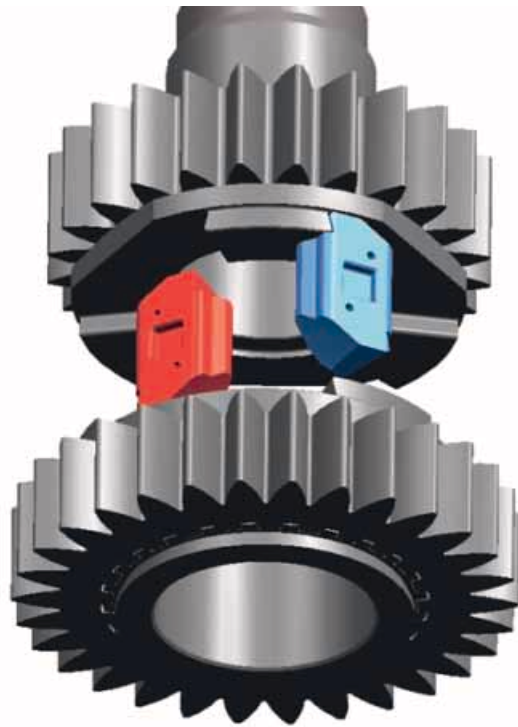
Free bullets (red) slide across to the second gear pair while loaded bullets (blue) remain engaged in first due to retention angle on the dog faces
